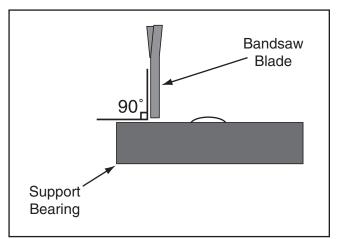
Blade should be perpendicular (90°) to the face of the support bearing.
